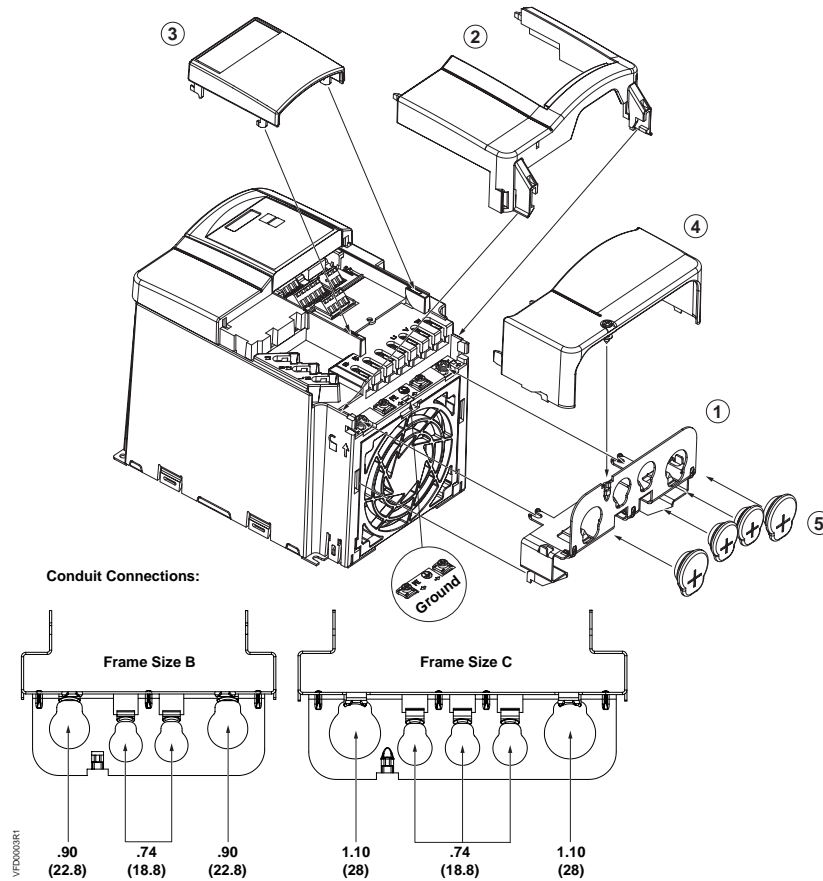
Frame Size B & C Gland Plate Installation and Conduit Connection Diameters in Inches (Millimeters).
